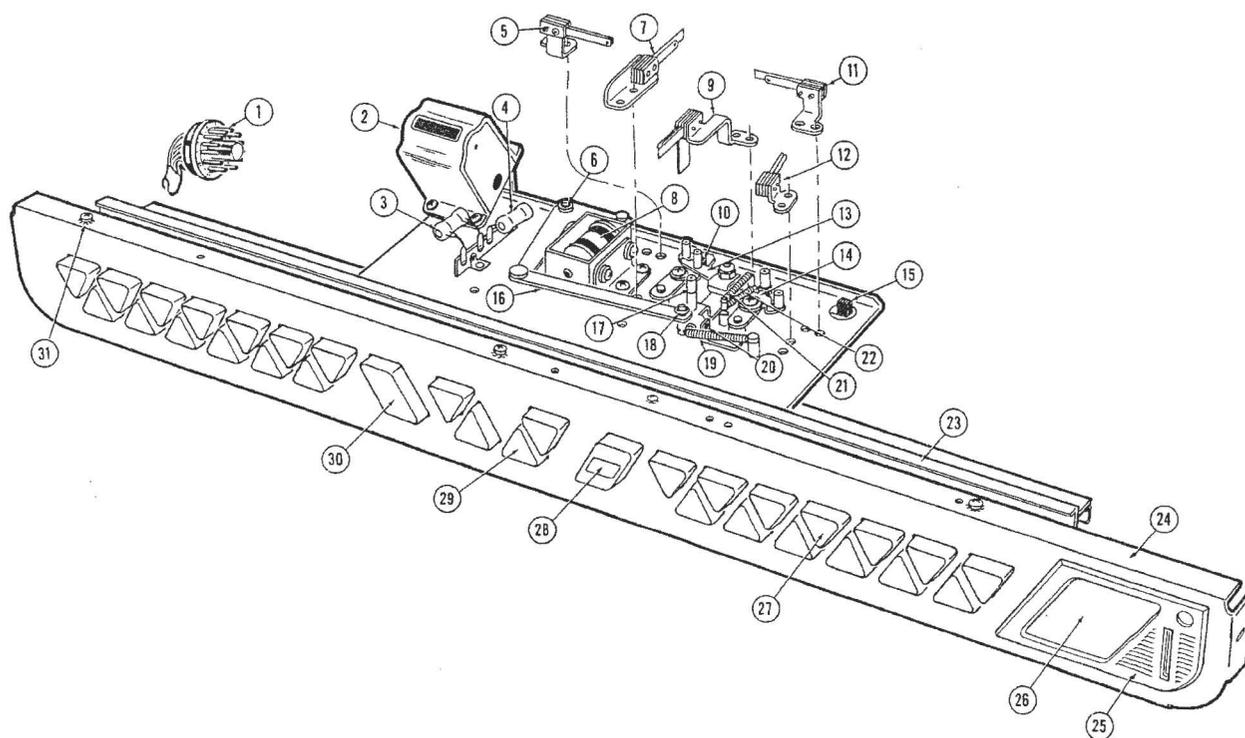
SELECTOR SWITCH ASSEMBLY, 2404-2404S
